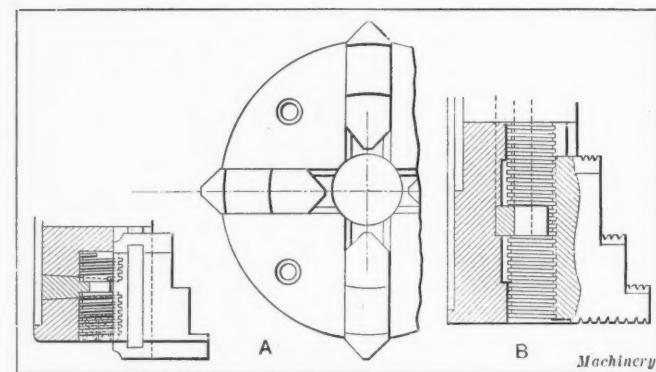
A, Horton Chuck Jaw with Tapered Block; B, Oneida Chuck with Thrust Ring
